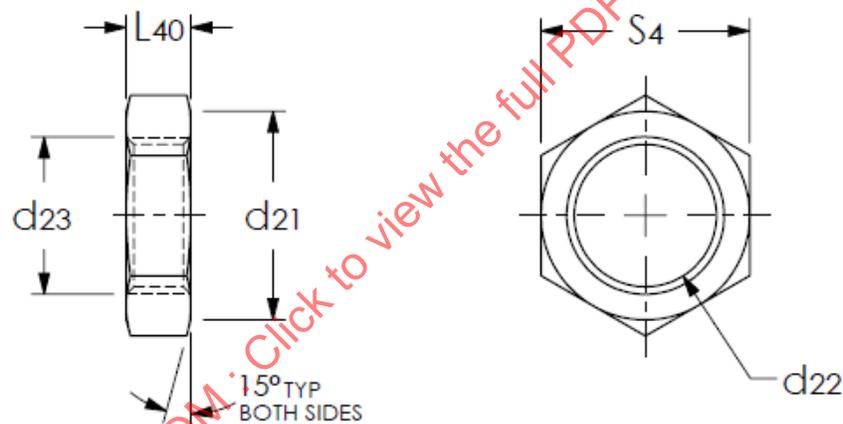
Bulkhead lock nut (070118, 07M0118)
